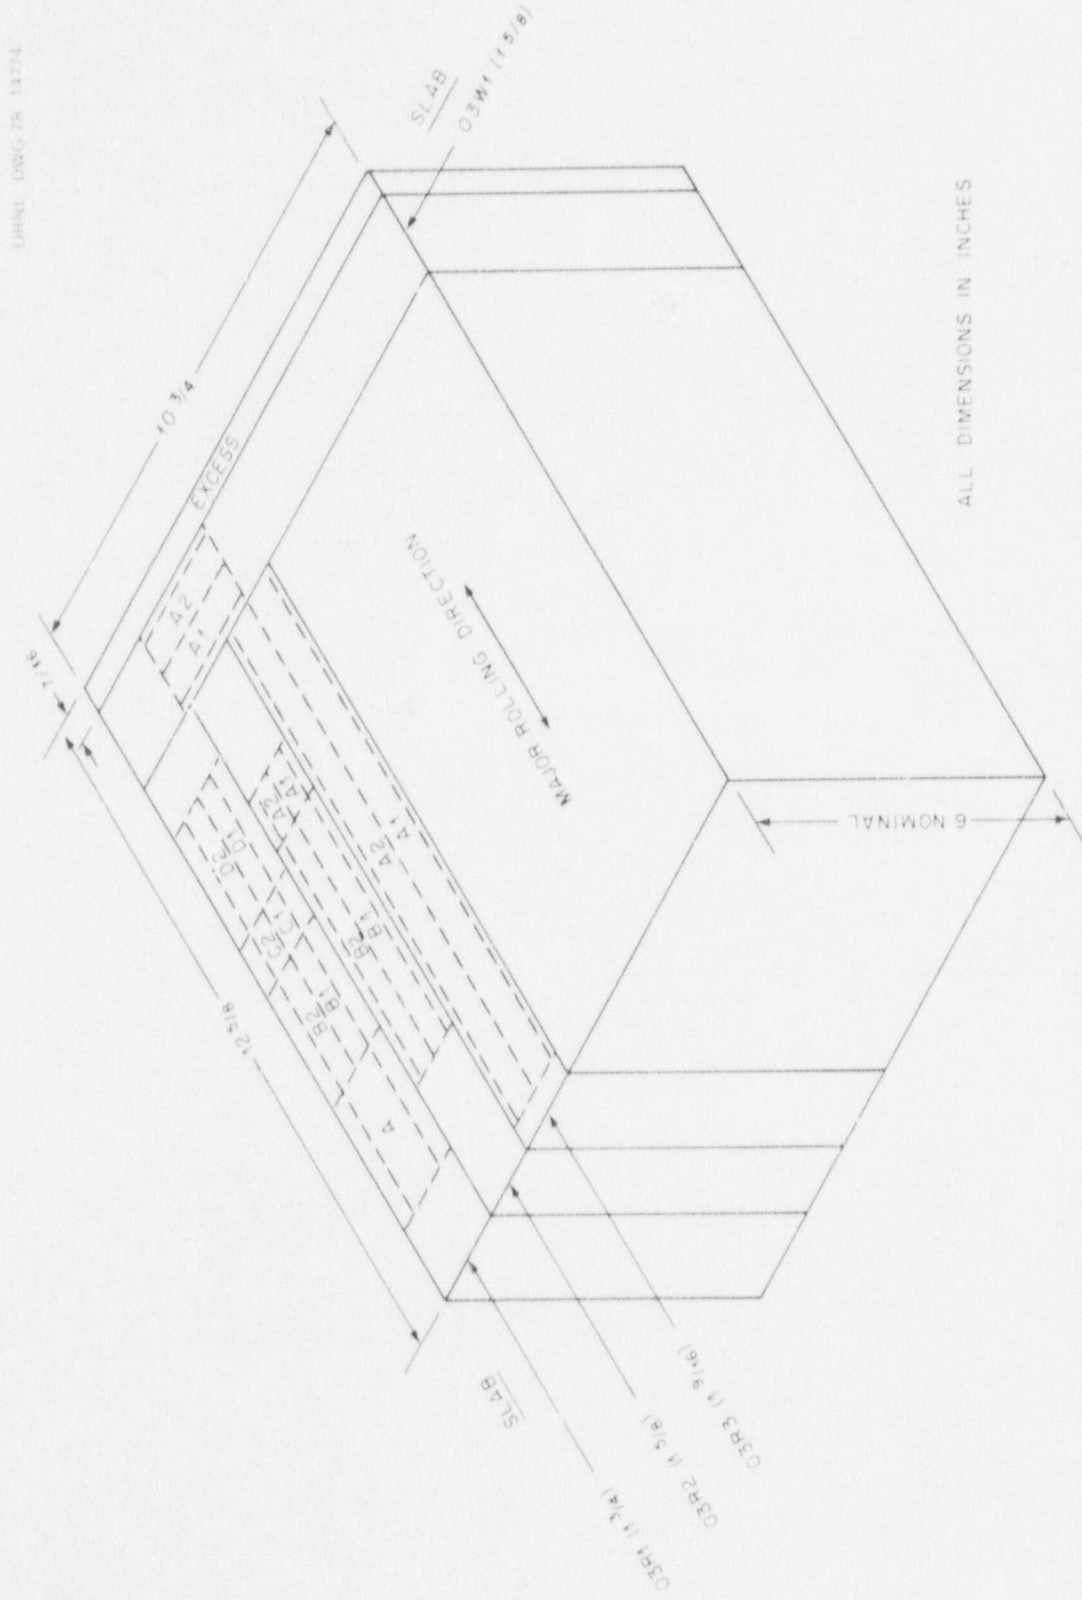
Cutting plan for HSSST plate section 03JZ (1 in. = 25.4 mm).
